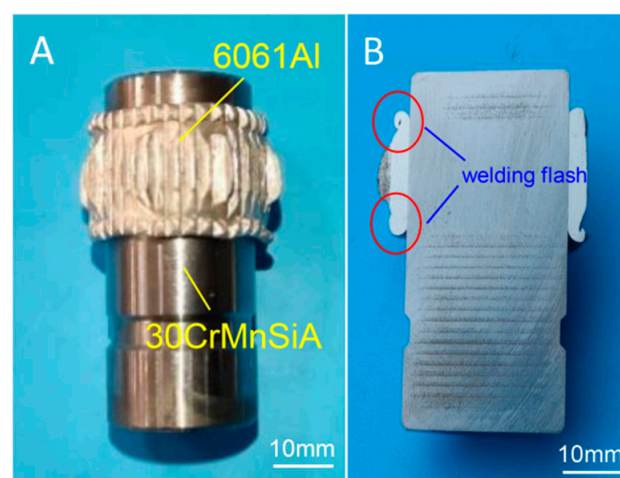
Macromorphology of the aluminum/steel IRFW joint: (A) Sample appearance; (B) Drawn cross-section.
